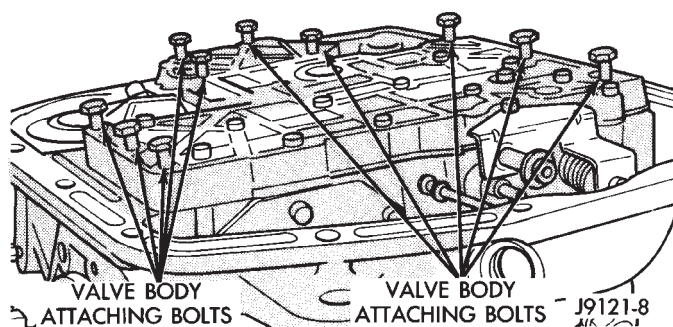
Valve Body Attaching Bolt Locations (Typical)
